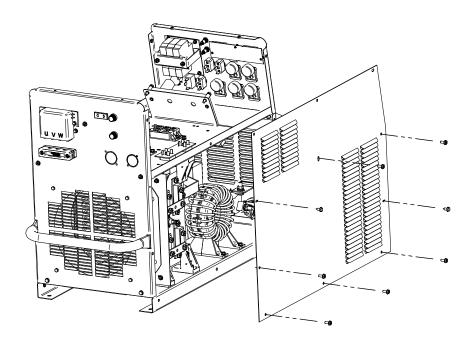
LEFT CASE SIDE REMOVAL
